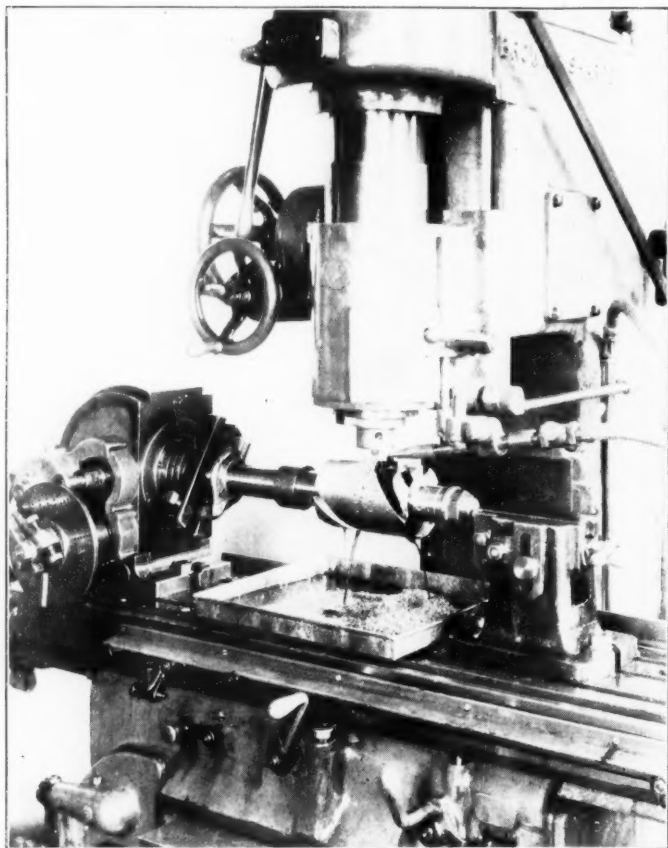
Gashing a helical milling cutter using a vertical spindle milling machine. Note point of delivery of cutting fluid.
